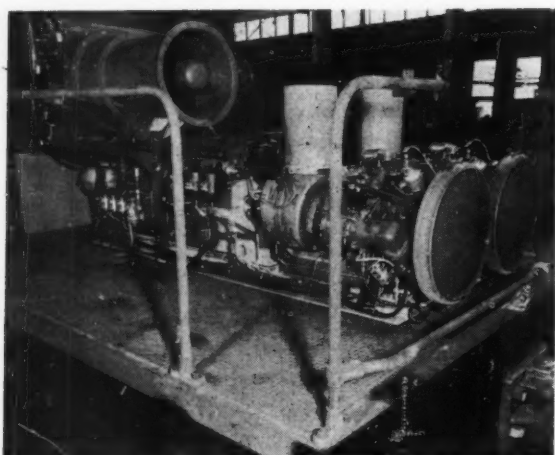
Right-front-corner view of locomotive with hood removed showing turbine power package. Note especially the circular oil-cooling radiators and attached air ducting in upper-left-hand corner.
